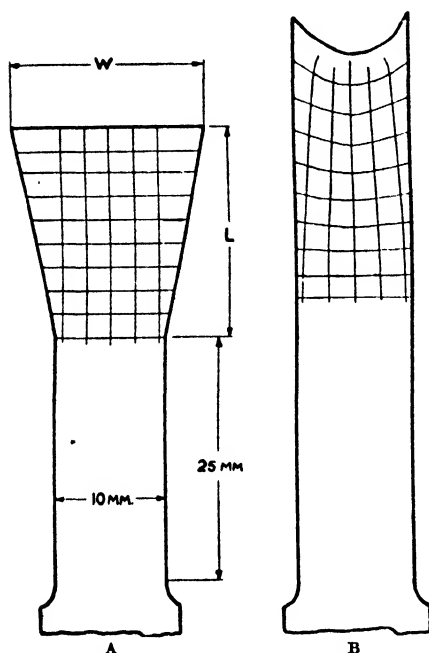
Specimen used in Sachs's wedge-drawing test: A before test, B after test.
